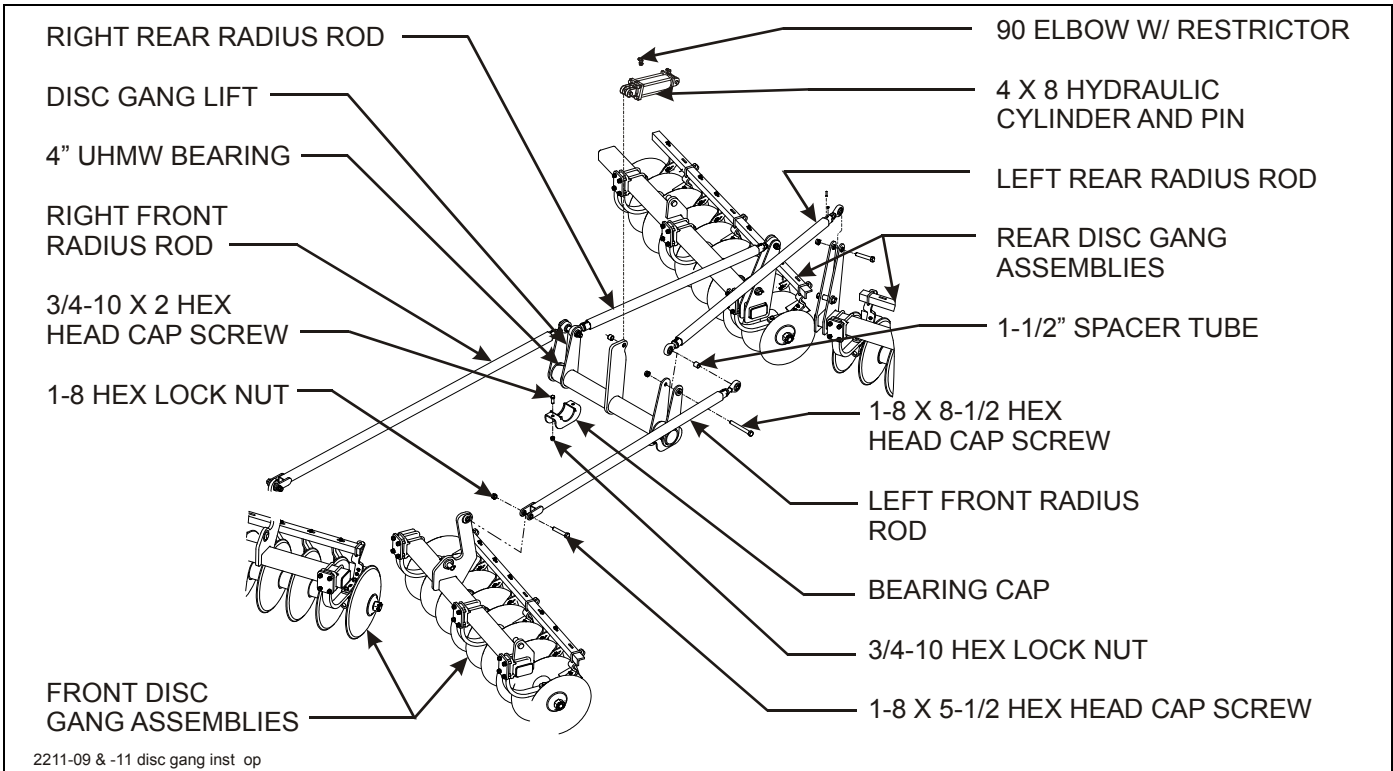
Disc Gang and Depth Adjustment Installation - 2211-09 & -11)
